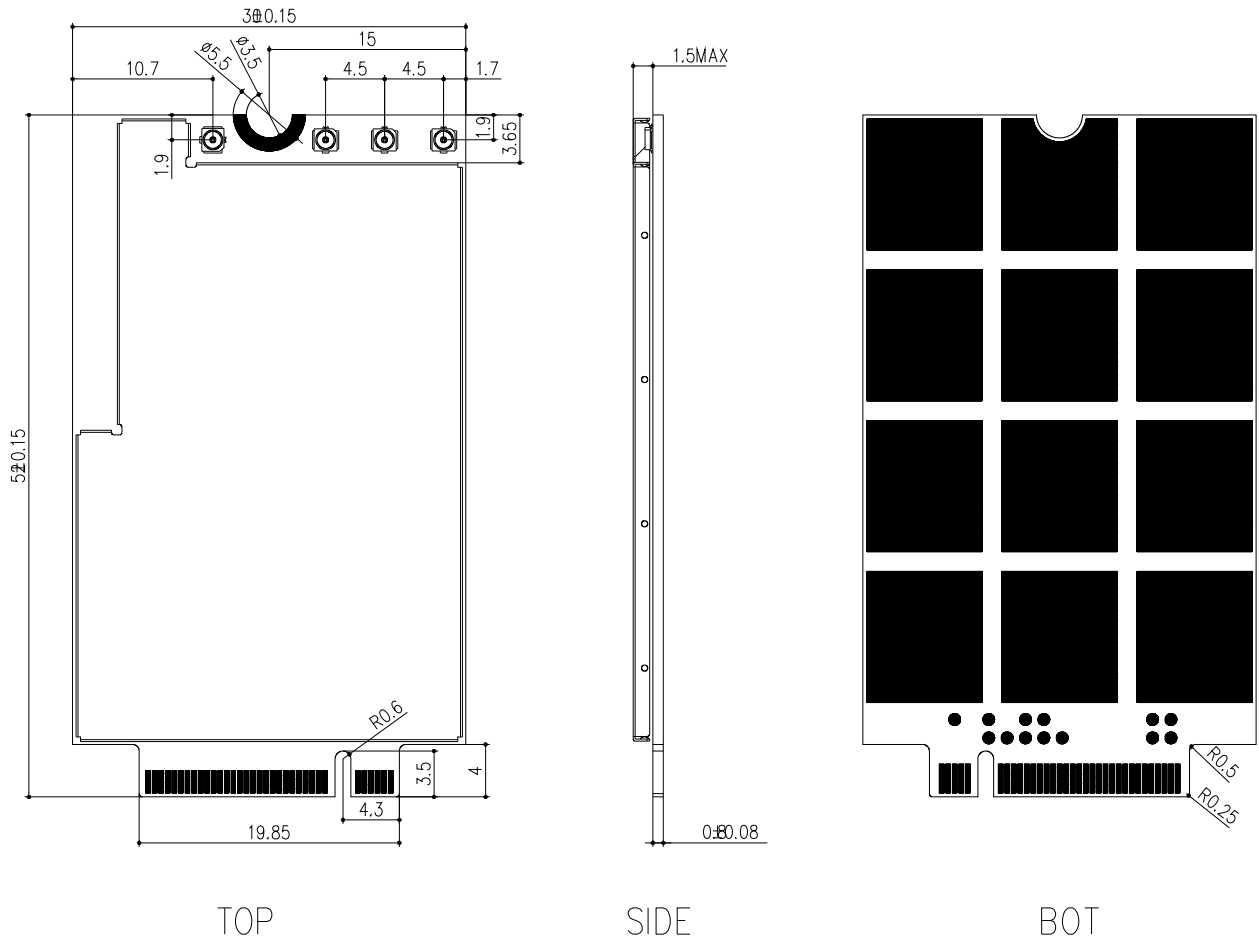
RM500Q-AE & RM502Q-AE Mechanical Dimensions (Unit: mm)
